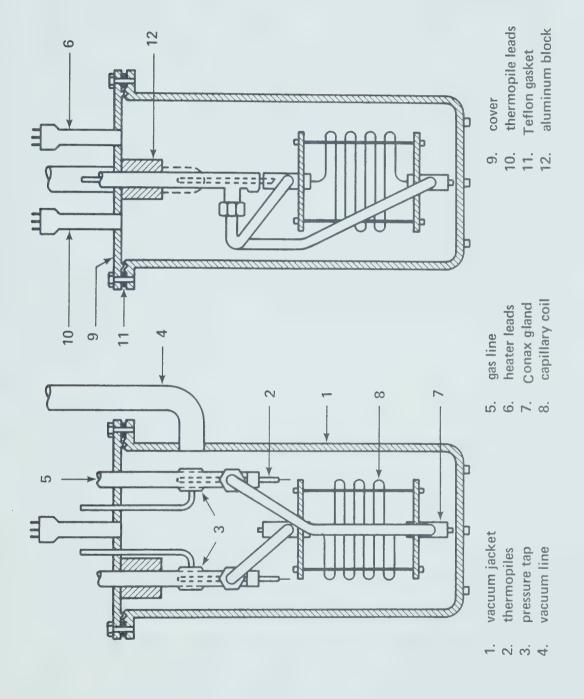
Assembly Drawing for Isothermal Throttling Calorimeter
